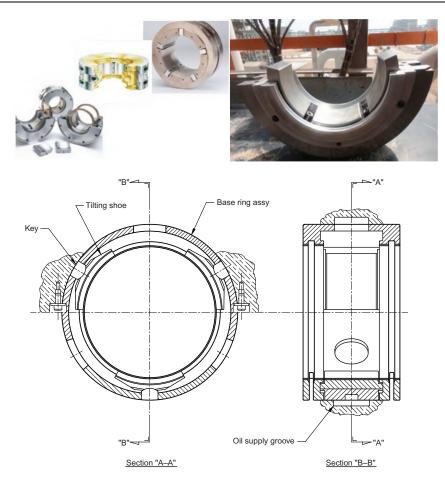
Top left*: Radial bearings; *Top right*: Section of a radial bearing; *Bottom*: Schematic of a tilting-pad or pivoted shoe radial journal bearing. Courtesy of the Elliott Company.
